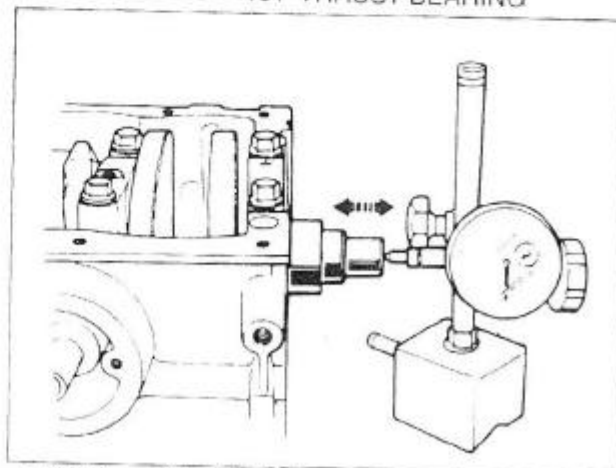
A — 102 MEASURING THE THRUST END PLAY OF CRANKSHAFT
